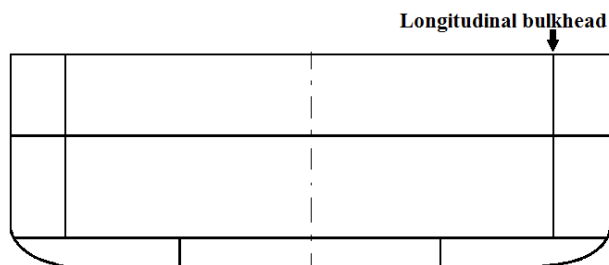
Cross section of arrangement with longitudinal bulkhead in double bottom
